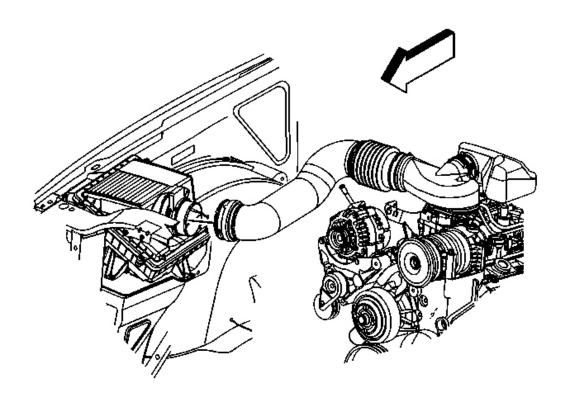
View Of Air Cleaner Outlet Duct Clamp Courtesy of GENERAL MOTORS CORP.
